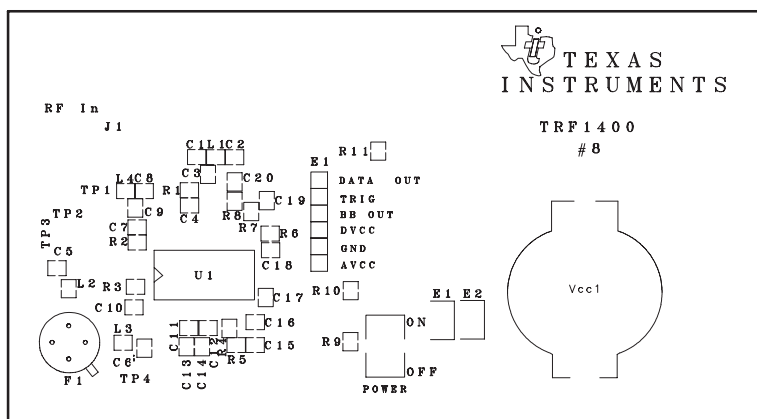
TRF1400 Demo Circuit Board Silk Screen
